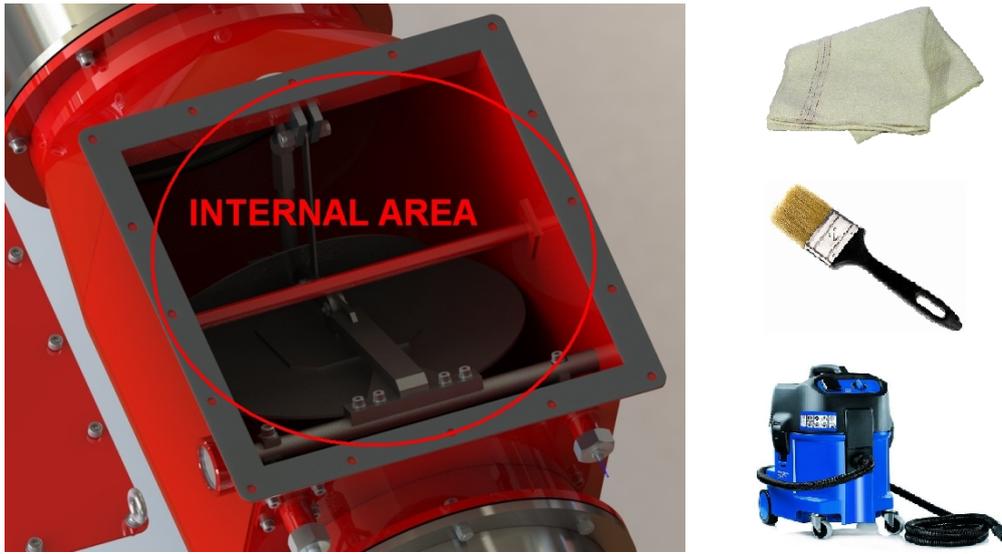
Open B-FLAP (the internal area of the valve which is necessary to clean and recommended tools for cleaning)
